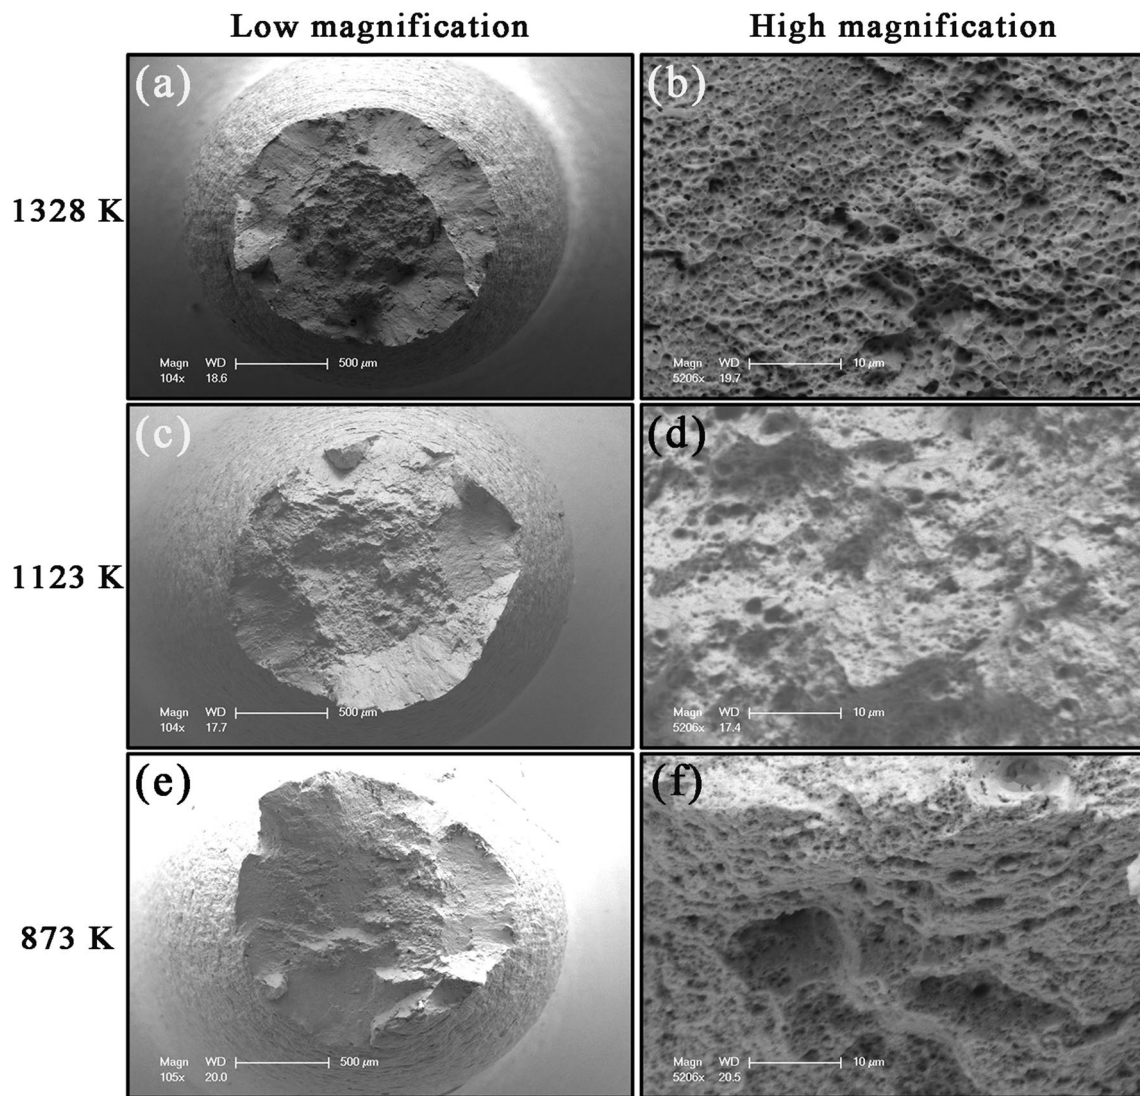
Fracture surfaces of SLMed 316L SS at different annealing temperatures
